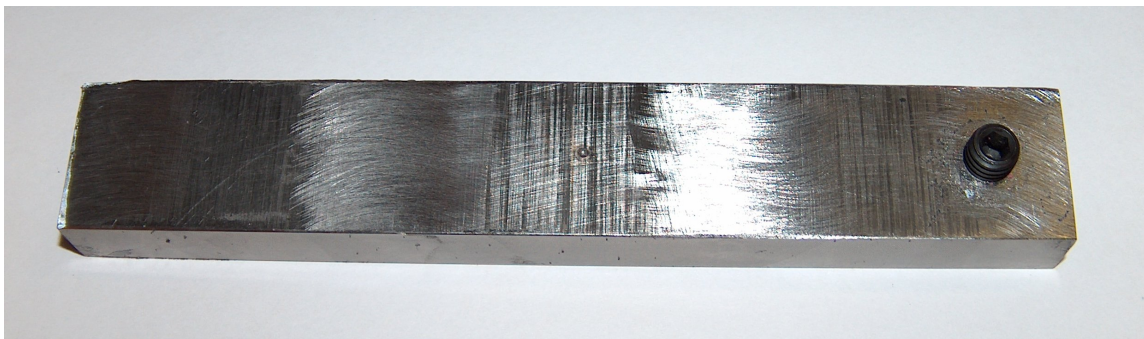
Figure showing the drilled and tapped hole used for mounting the transducer.
